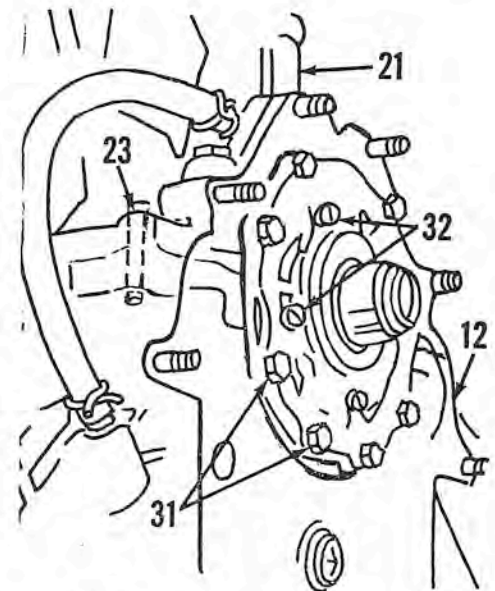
Lower view of power head assembly. To disassemble, remove lower head cap screws (31) and loosen screws (32). Drive out the tapered pins (23) by working from cylinder side. Refer to Fig. J98 for legend.
